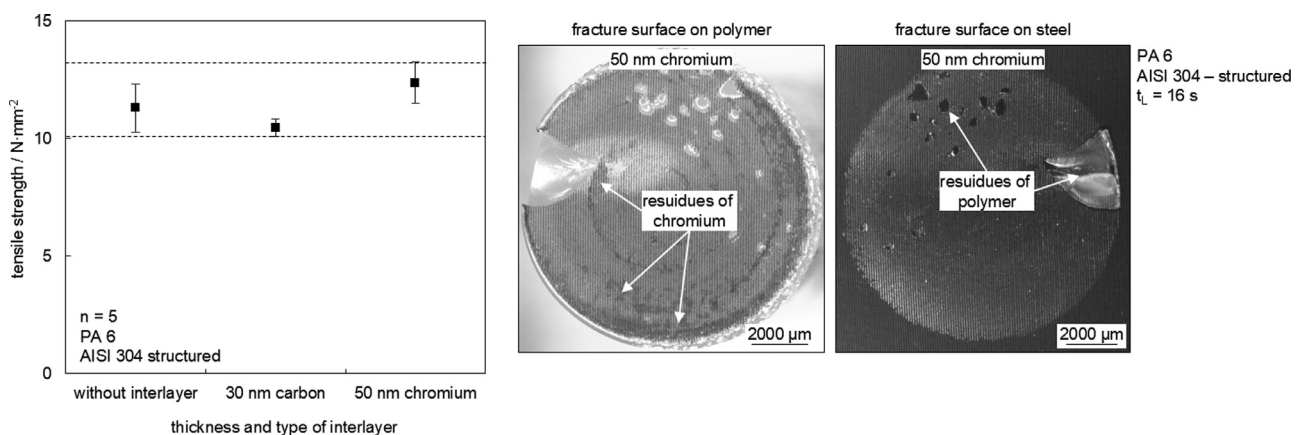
Tensile strength of structured specimens depending different interlayers and exemplary fracture surfaces.
